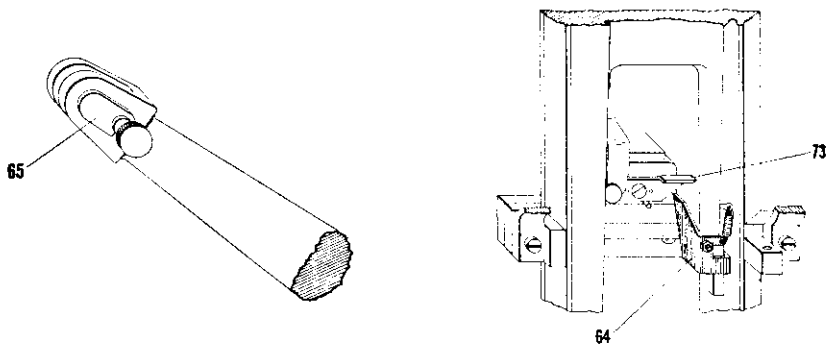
View at left is first elevator lever link hinge pin. View at right showing control rod lock releasing mechanism. The releasing latch 64, attached to the first elevator slide, engages lock release lever 73, turning it counter-clockwise when elevator rises, releasing the control rod lock, allowing vise jaws to return to normal.
